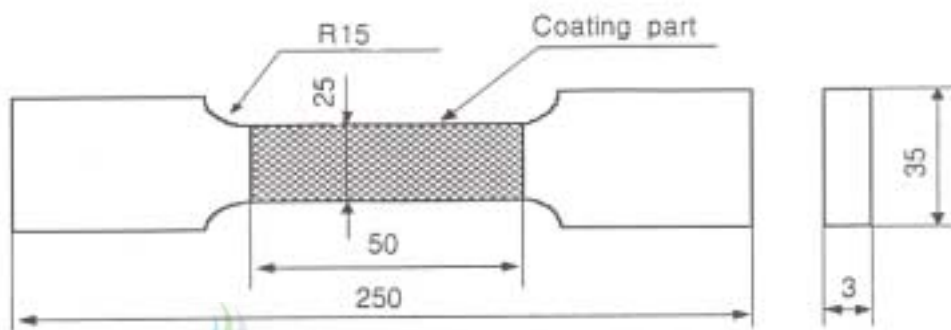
The shape and dimension of test specimen ( unit : mm )
